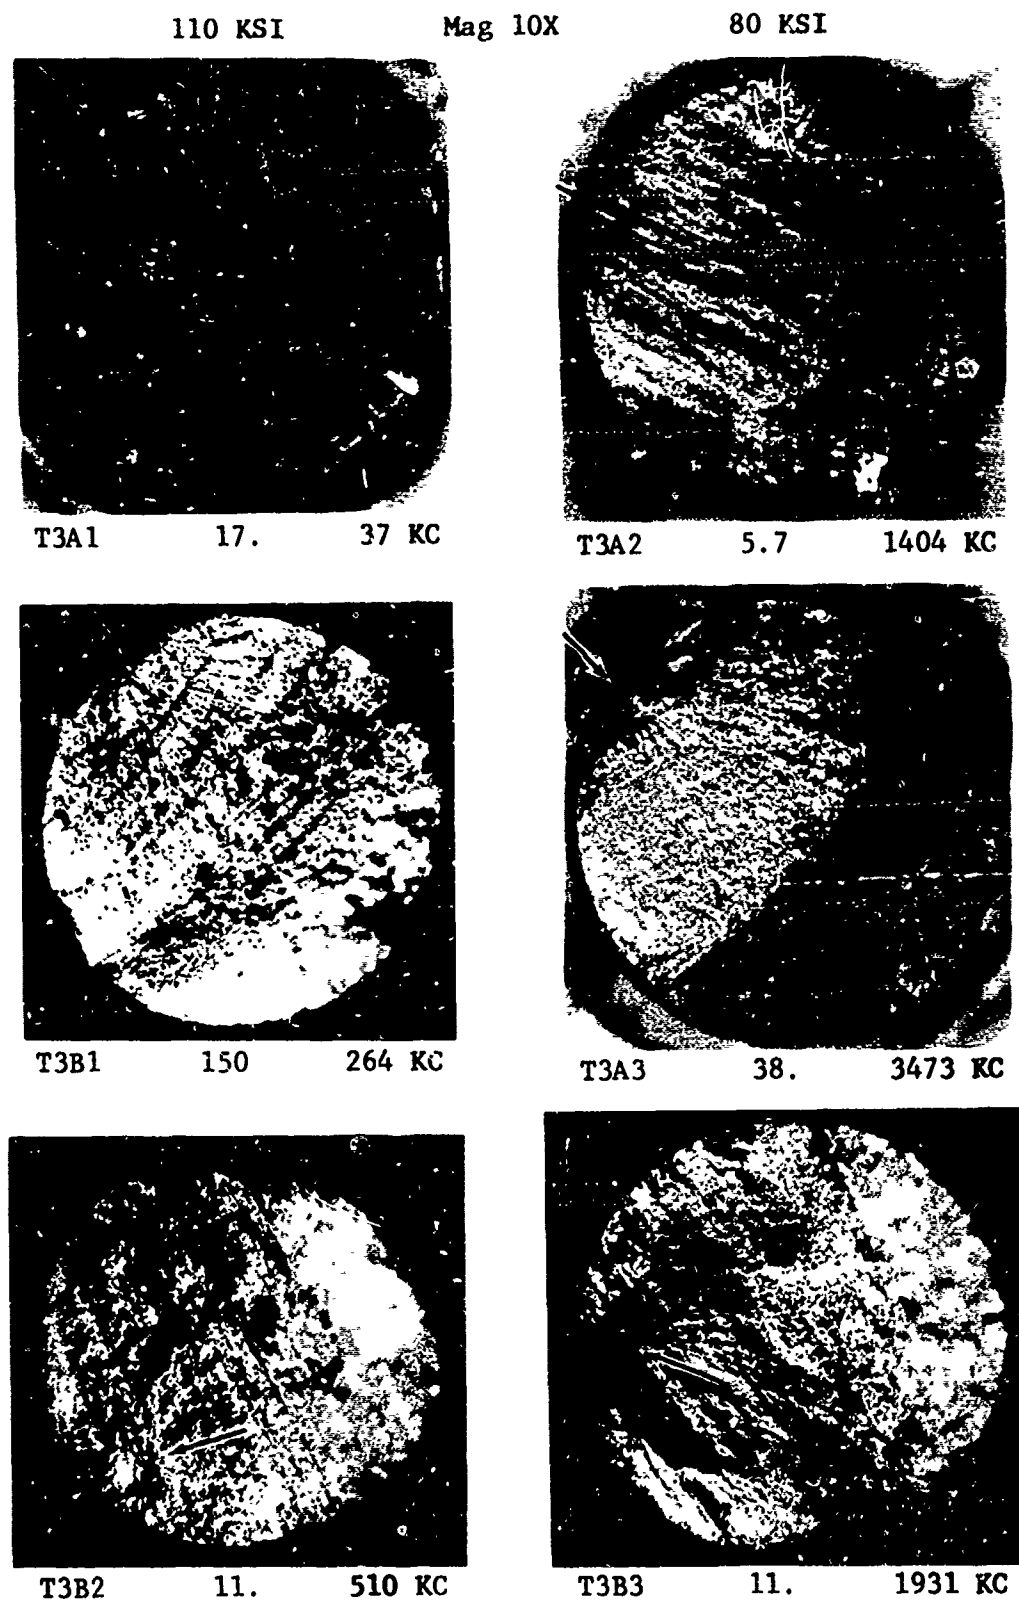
Fracture Surfaces of Failed Fatigue Specimens Series T3-
